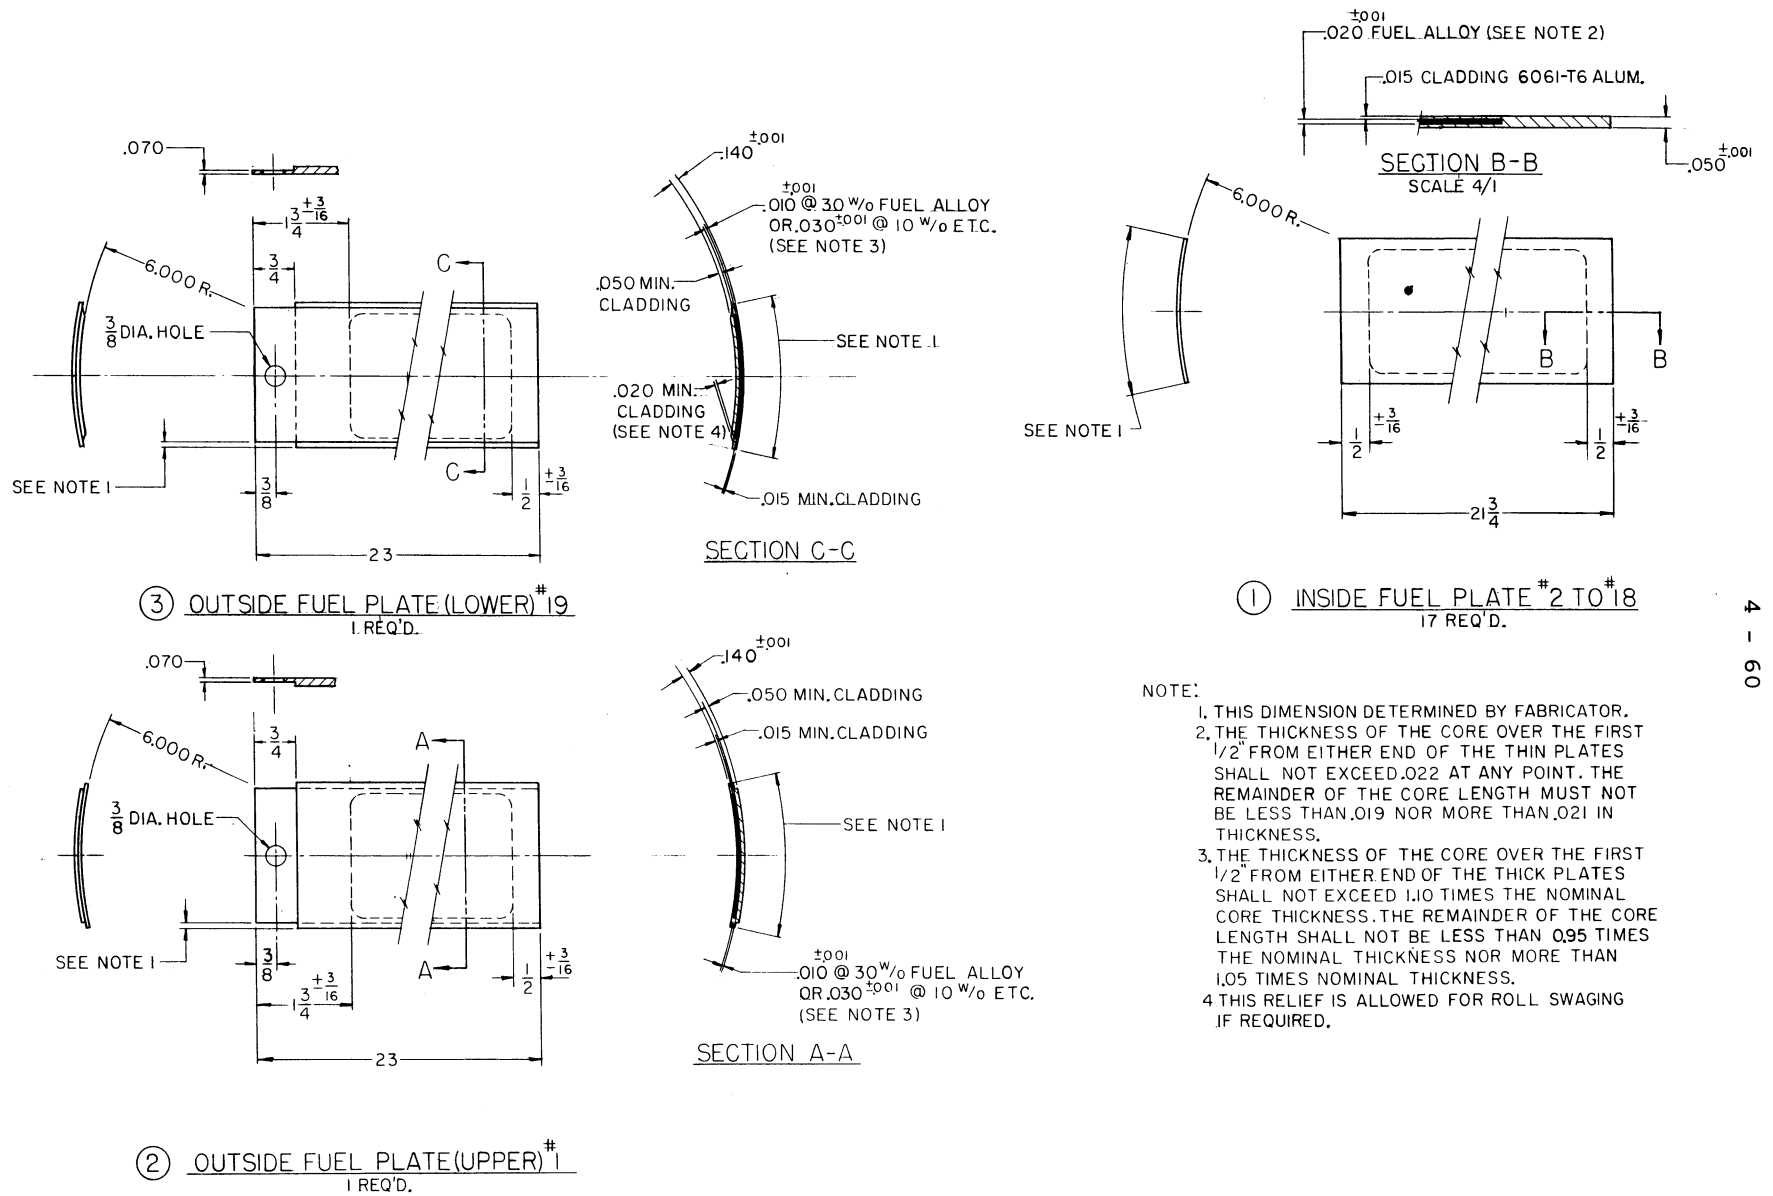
Fuel plate detail drawing, HFBR fuel element.
